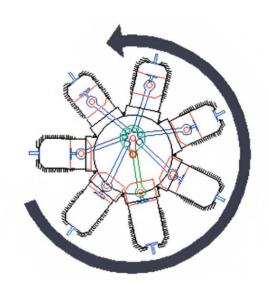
Radial-type engine. Reprinted from Cwojdziński & Adamski (2014).
